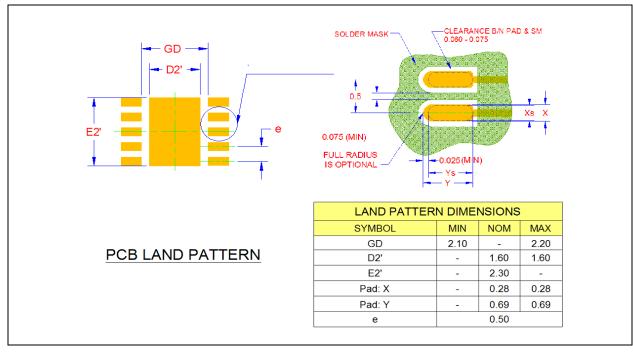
10-Pin DFN 3mm x 3mm PCB Footprint
